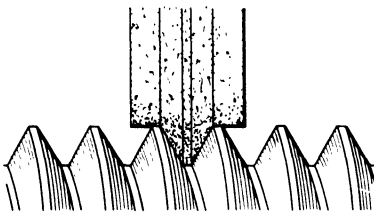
CRUSHED WHEEL GRINDING A COMPLETE THREAD FORM
